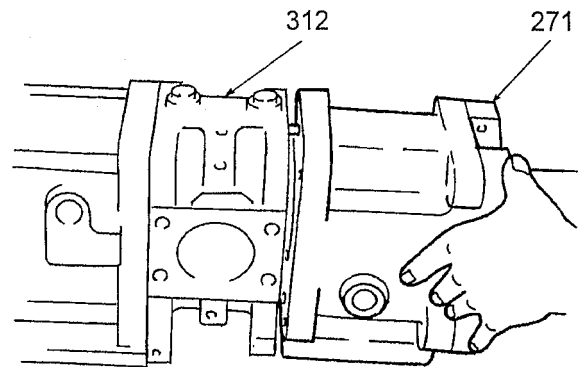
Disassembling the pump casing (271) and the valve block (312)
